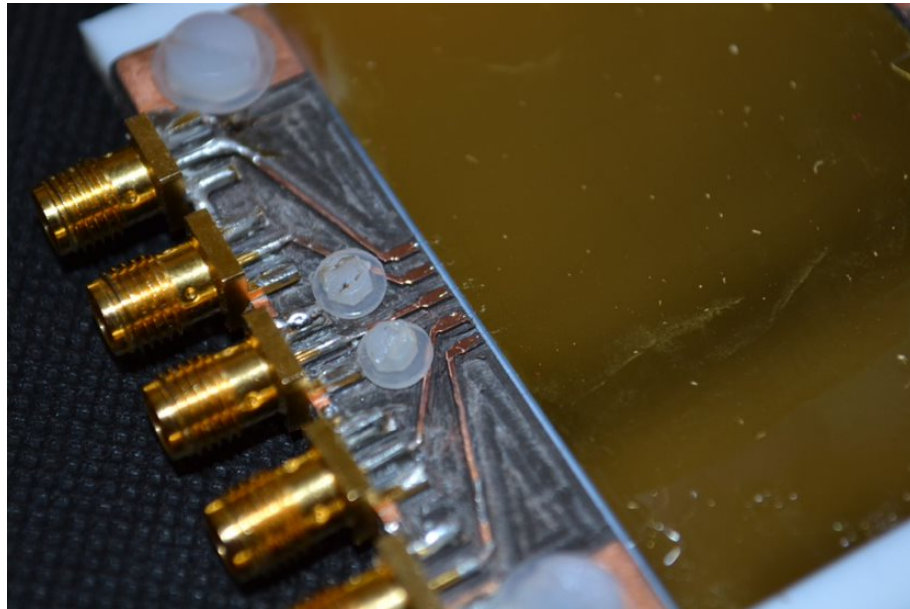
MIR Chip wire-bonded to the PCB board. Both of them are fixed to a PTFE board.
